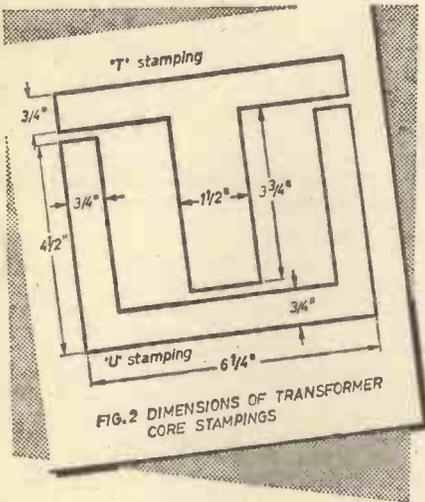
DIMENSIONS OF TRANSFORMER CORE STAMPINGS
